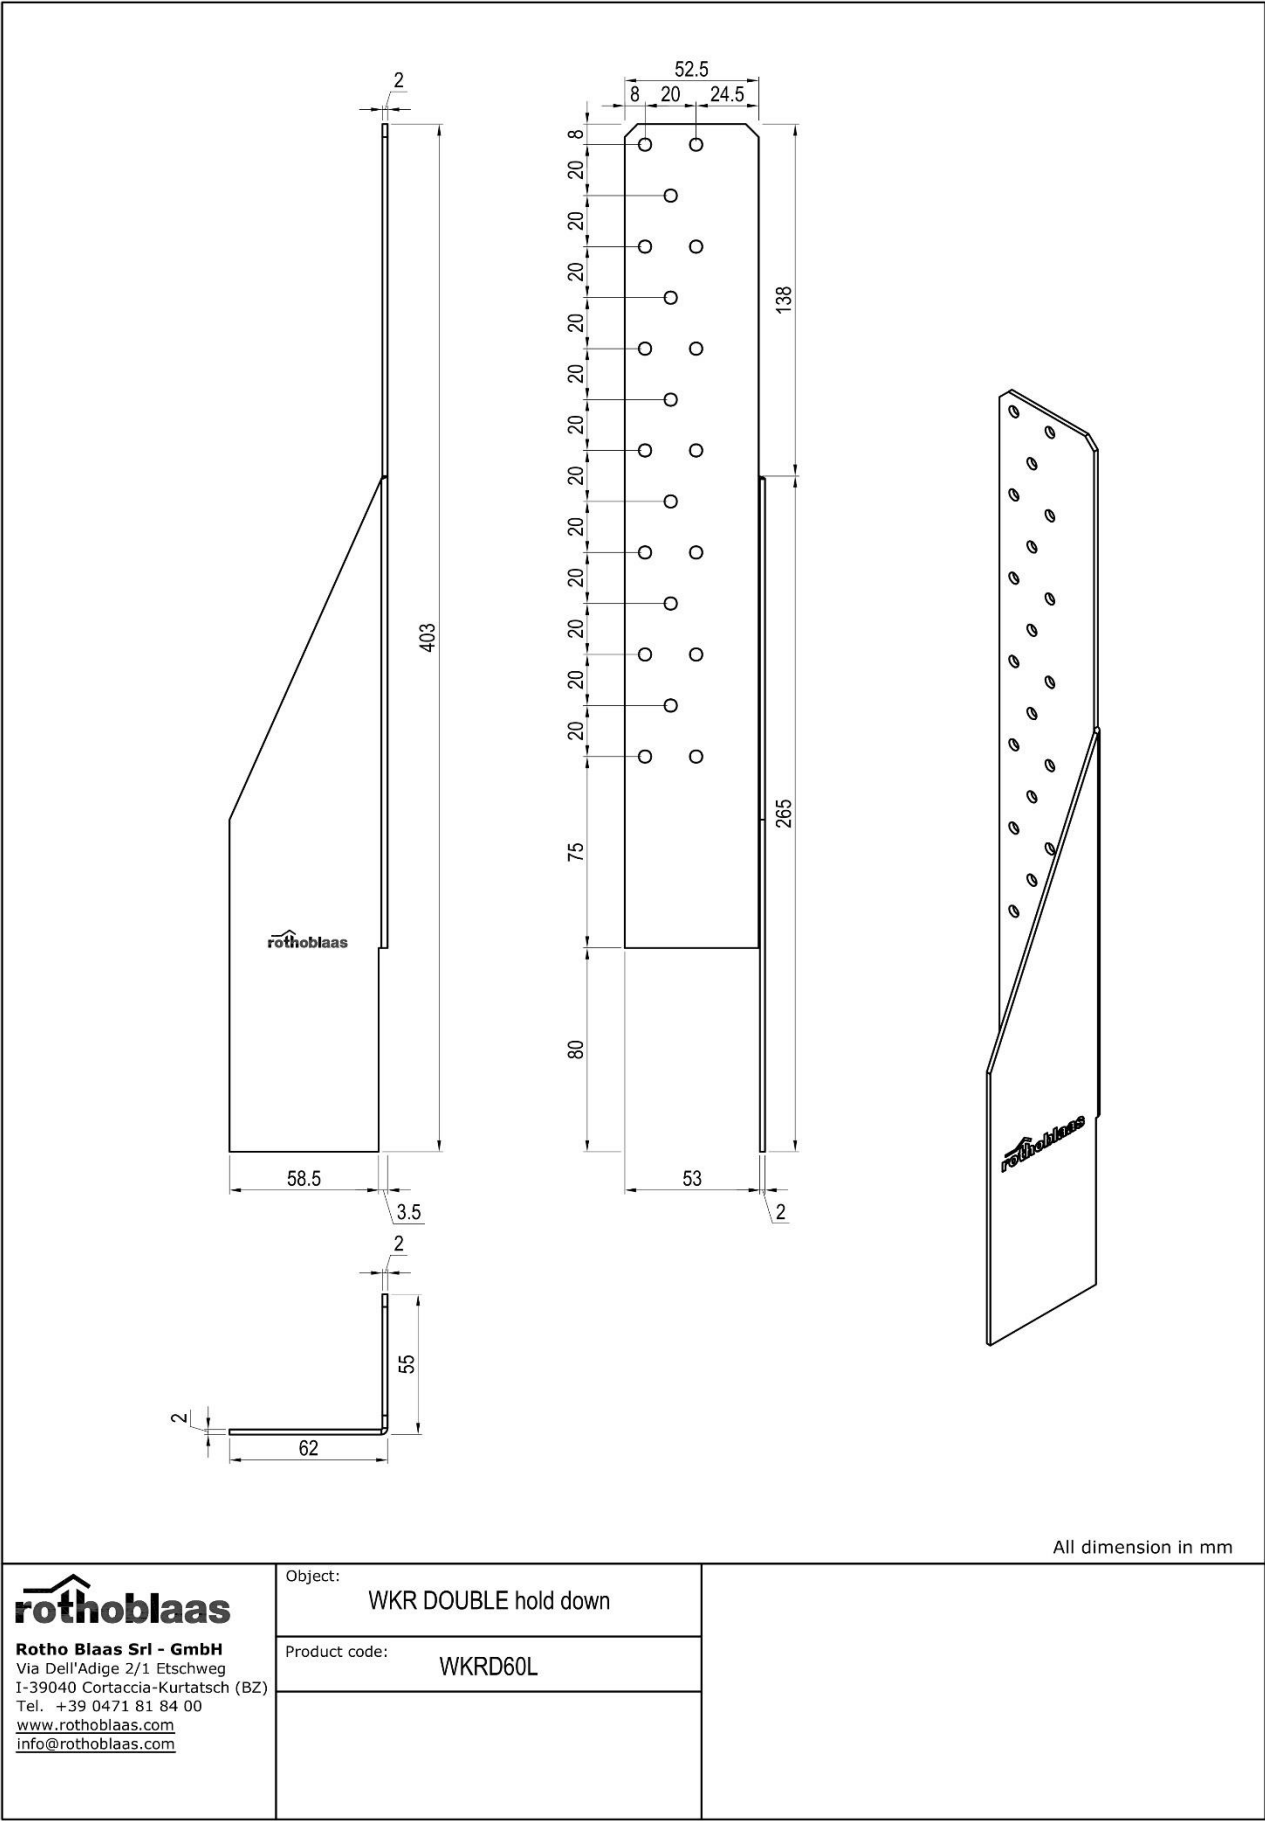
Dimensions of Rotho Blaas WKRD60L
